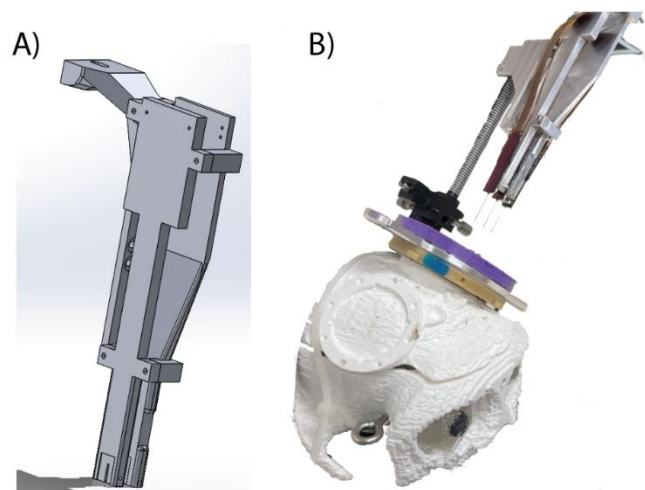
Three-probe linear fixture design and physical implementation. (A) CAD model in SolidWorks showing the two-part probe-holding body and clamping mechanism. (B) Fully assembled fixture mounted on a model chamber.
